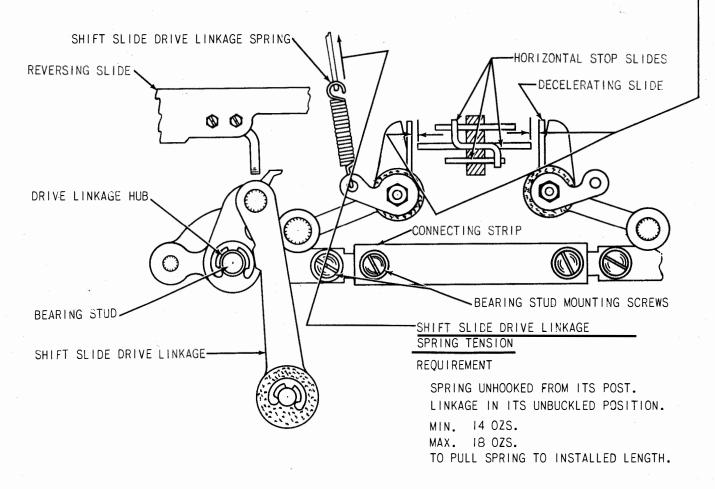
Automatic Typer, Shift Slide Drive Mechanism
